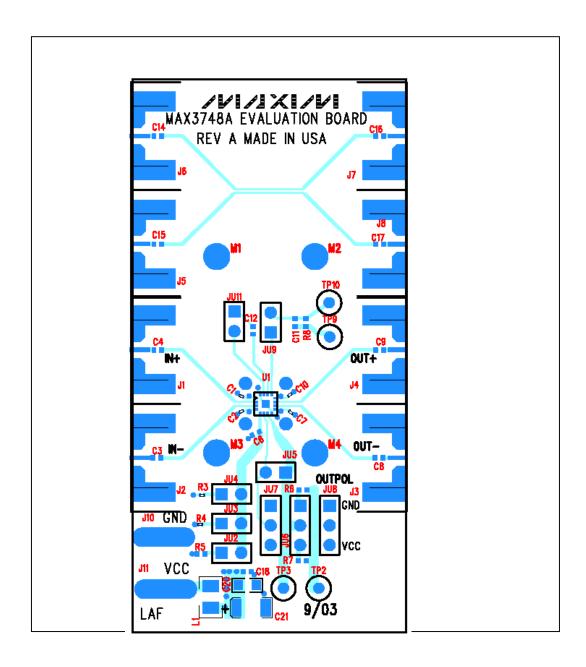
MAX3748A EV Kit Component Placement Guide – Component Side (2X)
